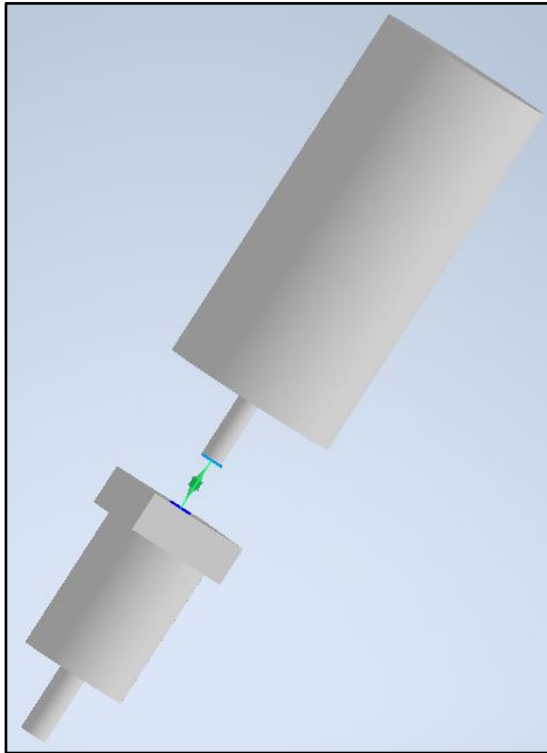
Preliminary design of the coupling between the BG 65x75 motor and the CP 005 MF gear train
